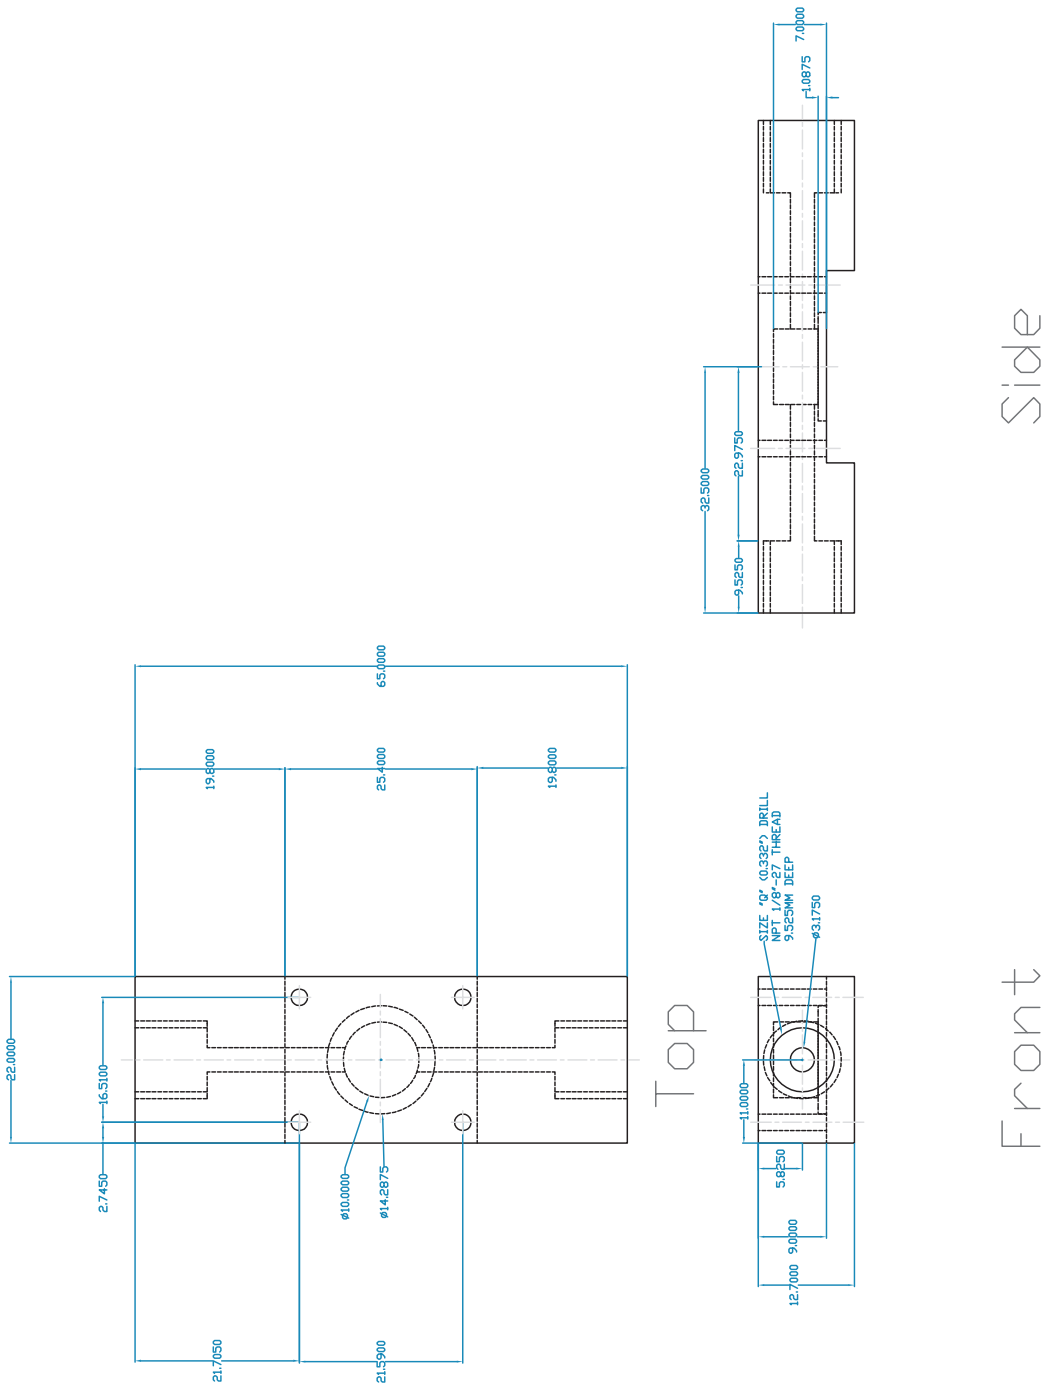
Mechanical drawing of the polycarbonate chamber.
